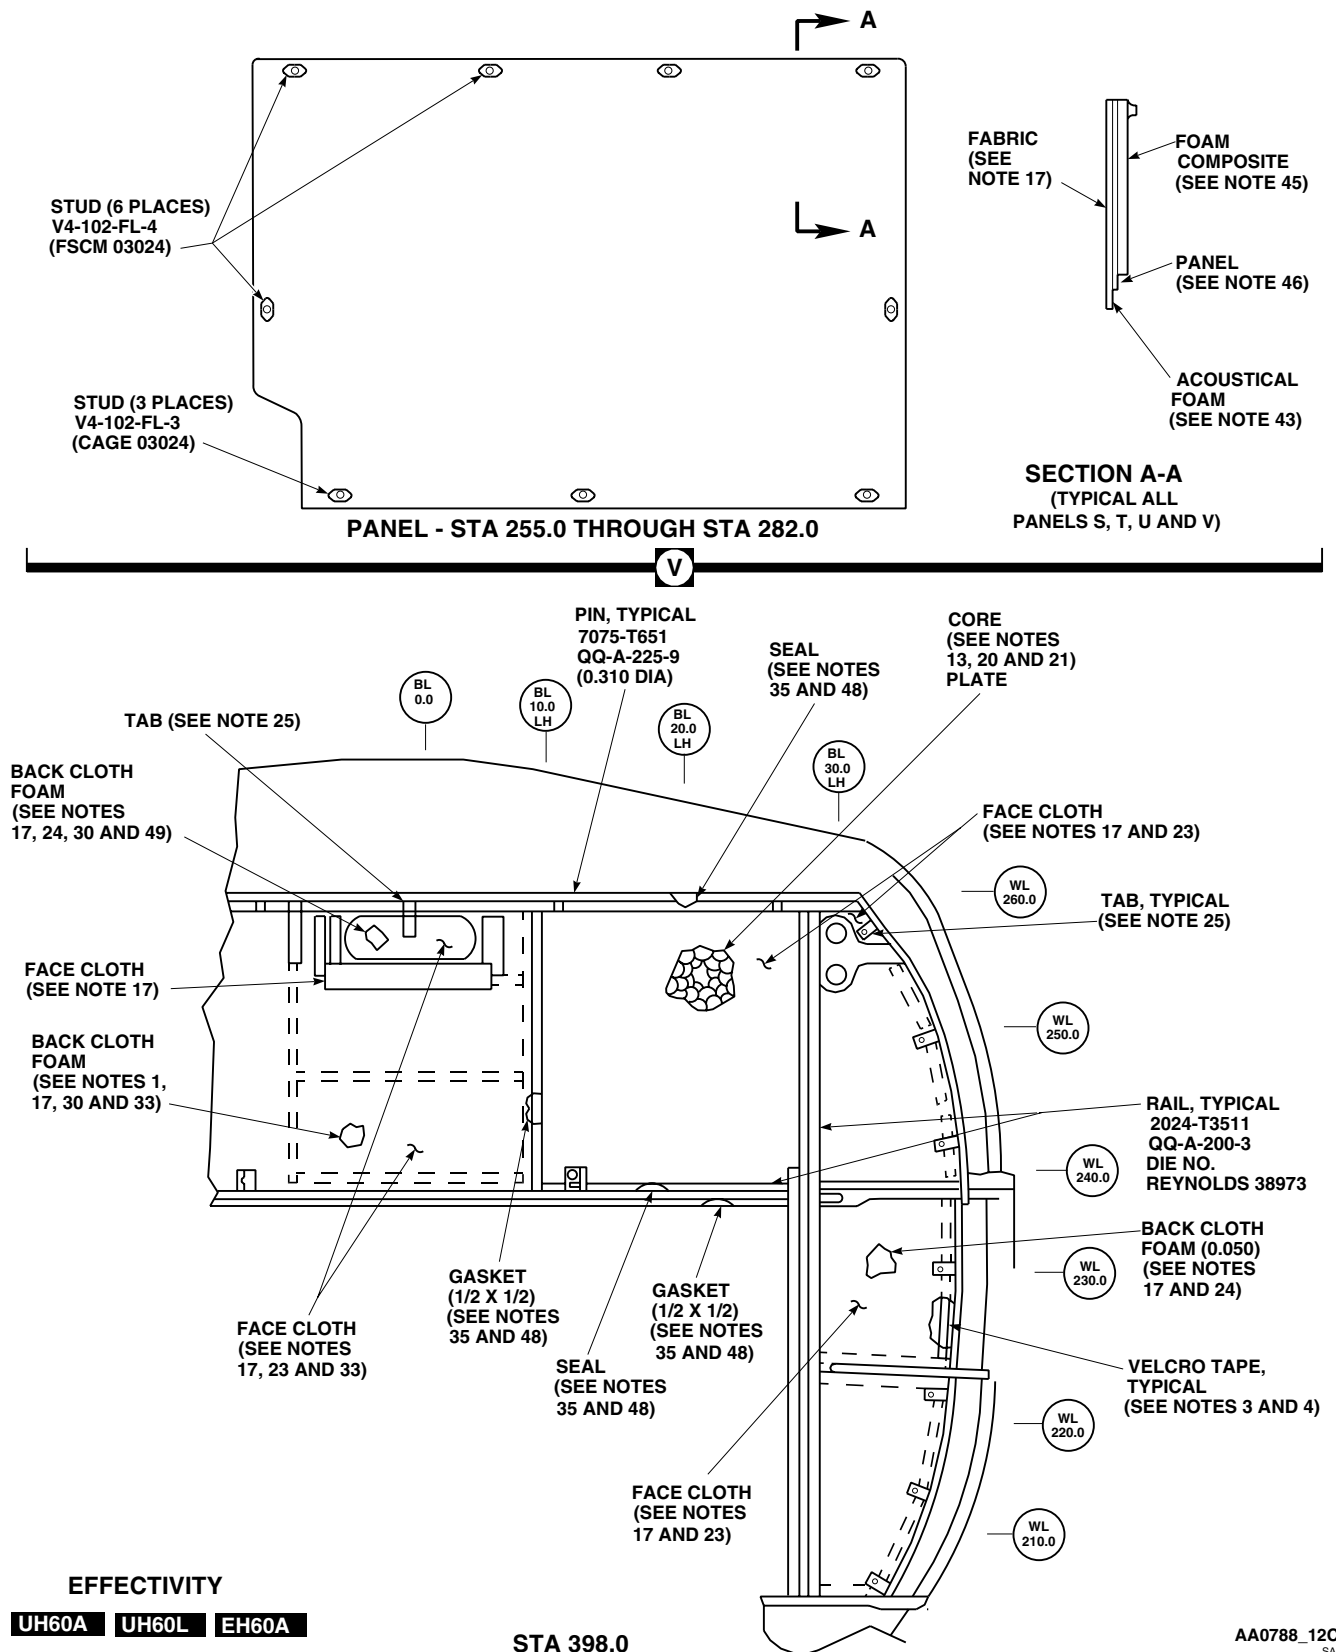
Soundproofing Panels (AVIM). (Sheet 12 of 13)
